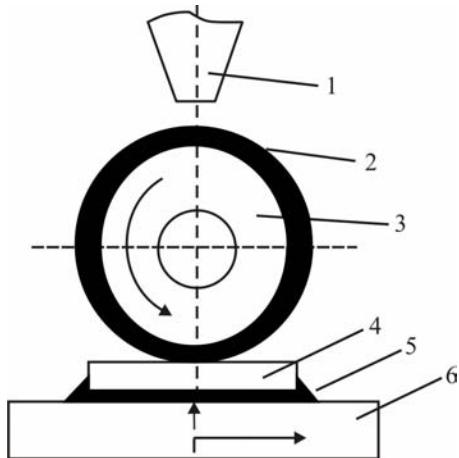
Cutting by diamond disc with the outer cutting blade:
